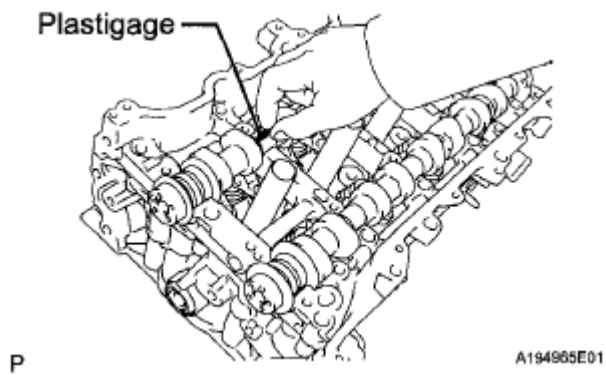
Inspecting Camshaft Oil Clearance
